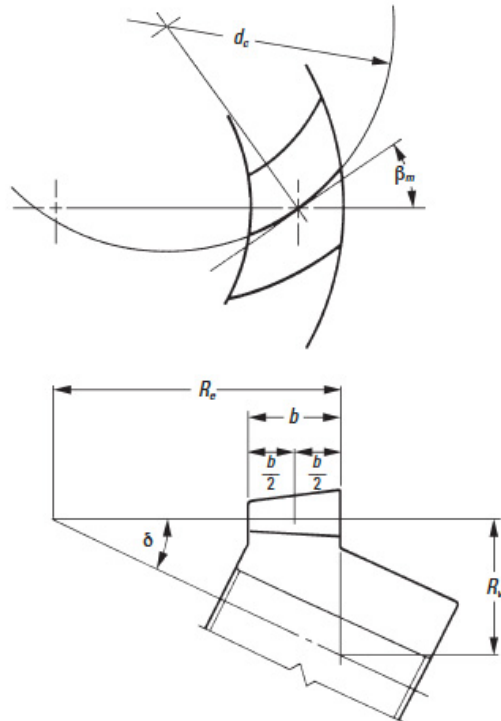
Spiral Bevel Gear (Left-Hand)
